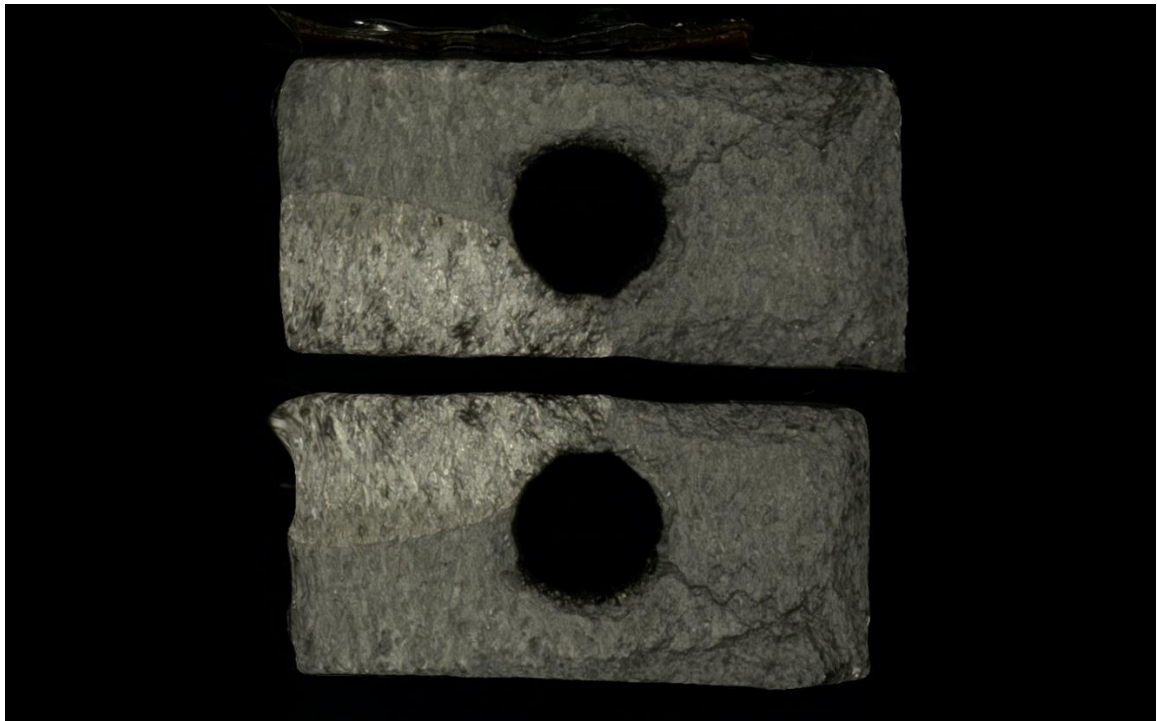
Specimen E1 fracture surface (150,000 cycles : 78.43 ksi / 540.8 MPa)
